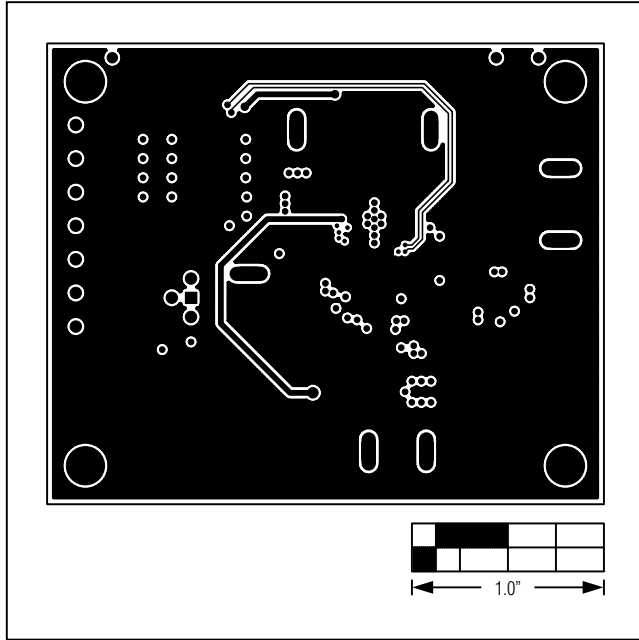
MAX17019 EV Kit PCB Layout—Layer 3
